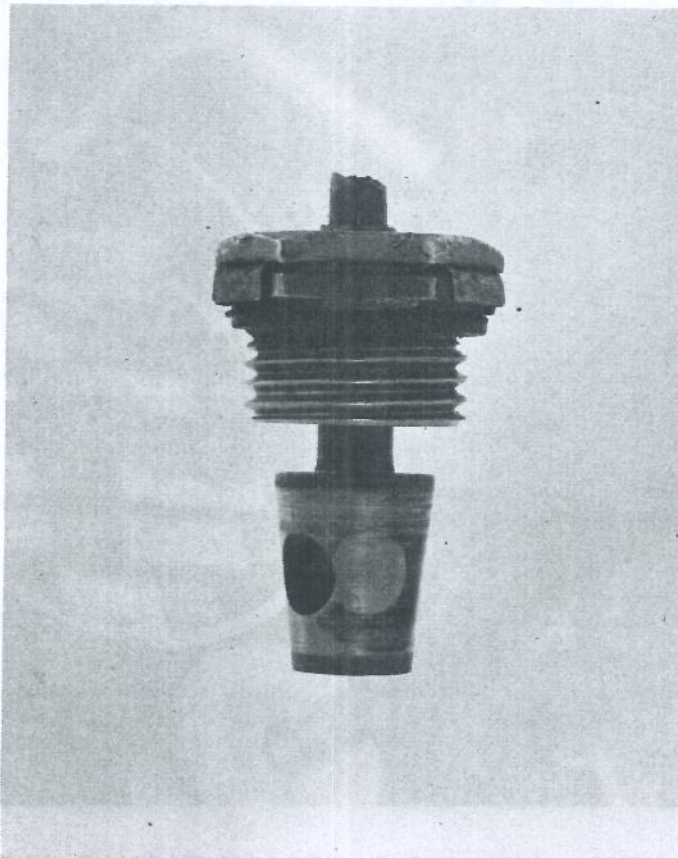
SHOWING WITNESS MARK ON PLUG OF FUEL COCK
